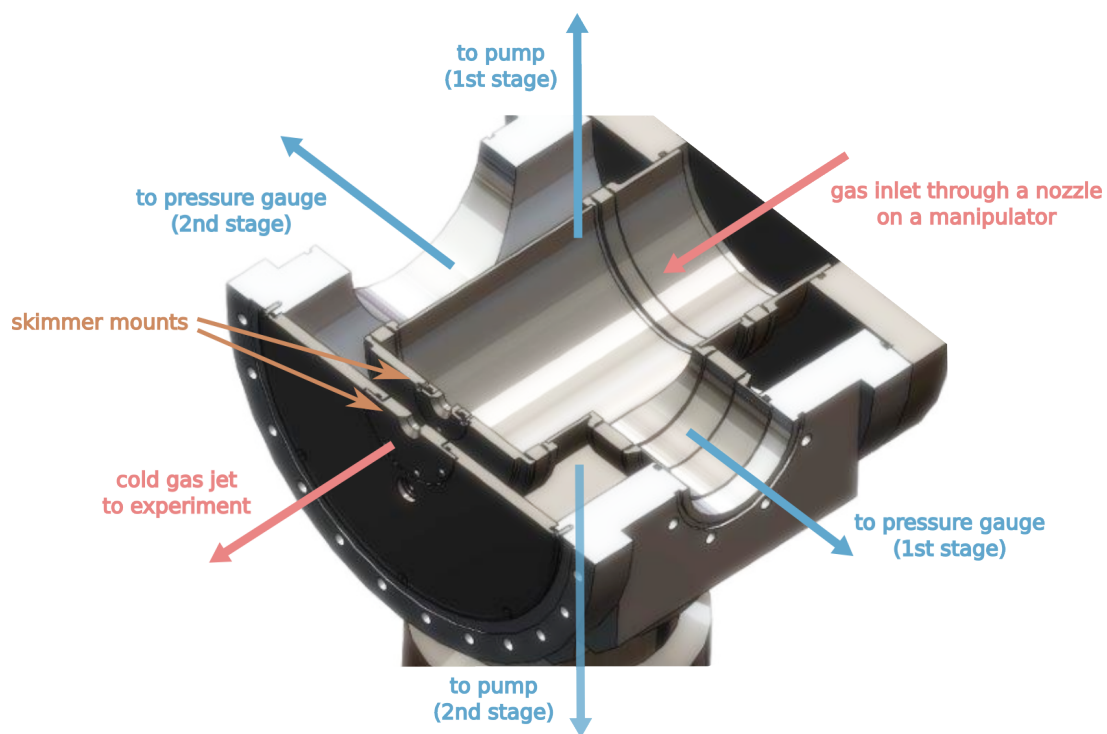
CAD drawing of the first two chambers for cold gas jet generation.
